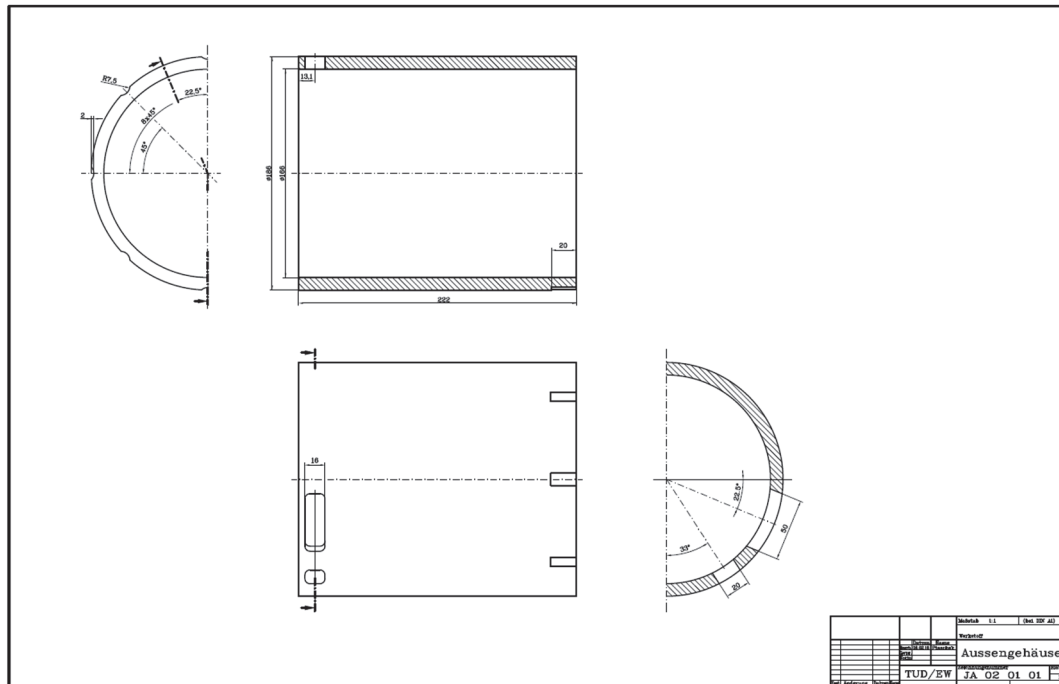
Drawing of housing outer component of the electric machine for the DE-REX powertrain (EM1, EM2, EM3, EM4)
